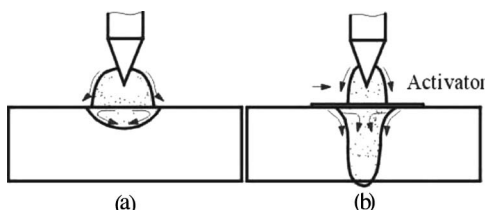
Schematic sketch of penetration in (a) conventional TIG and (b) A-TIG welding.
